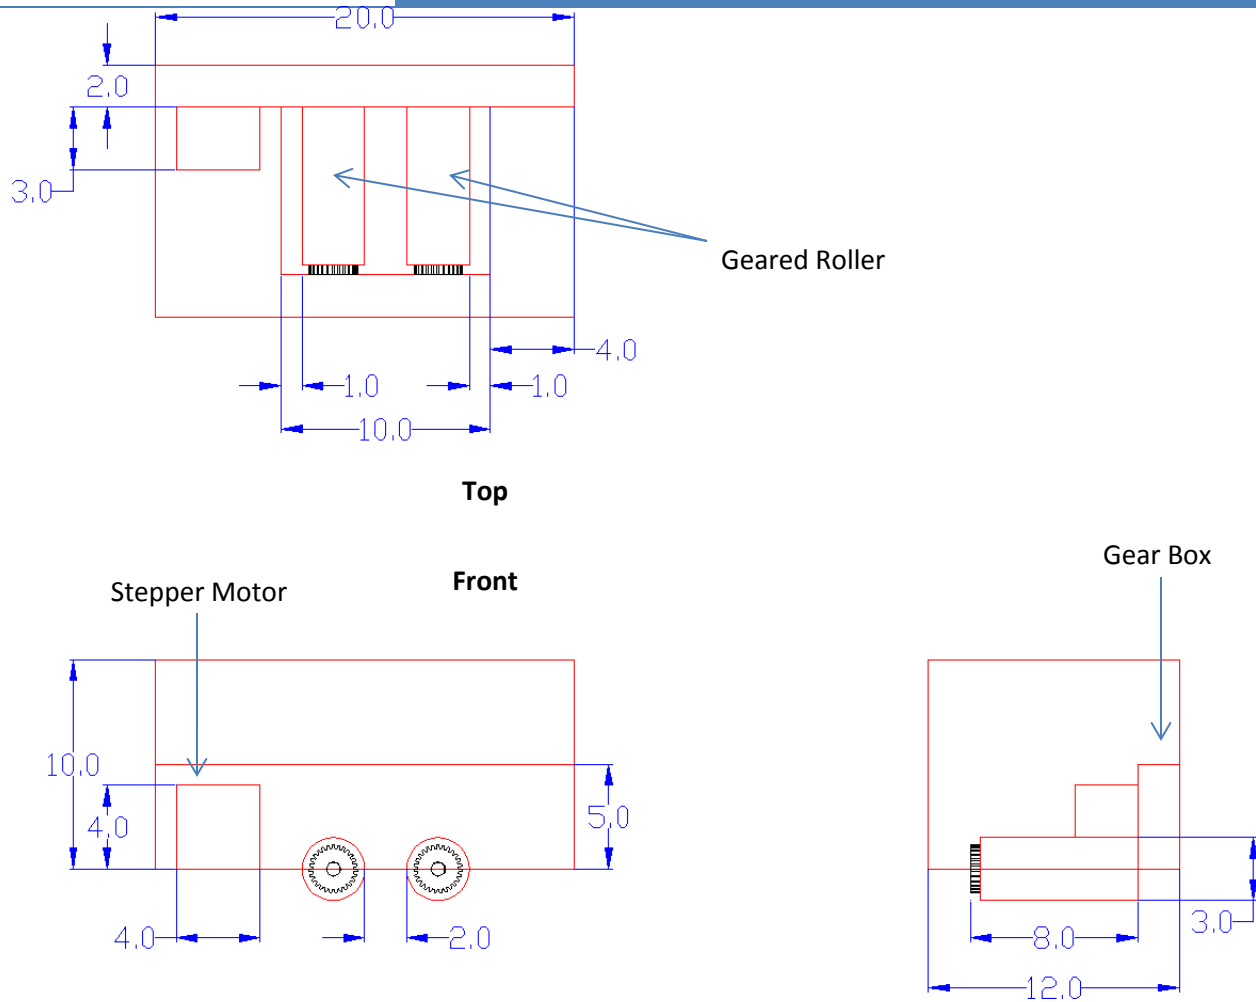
Orthographic view of label reader pill bottle rotating mechanism
